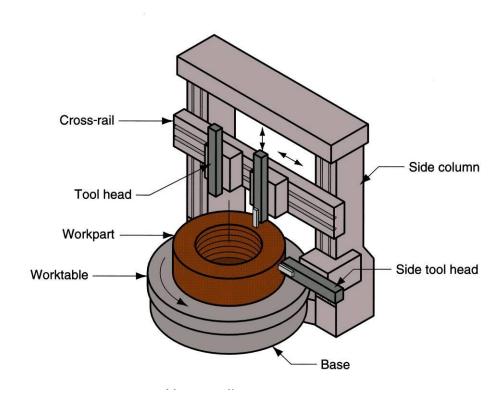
A vertical boring mill – for large, heavy workparts.
